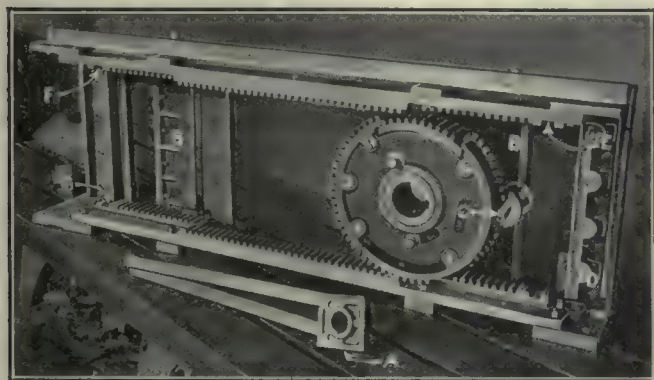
GEAR AND RACK OF THE PREMIER PRINTING PRESS
